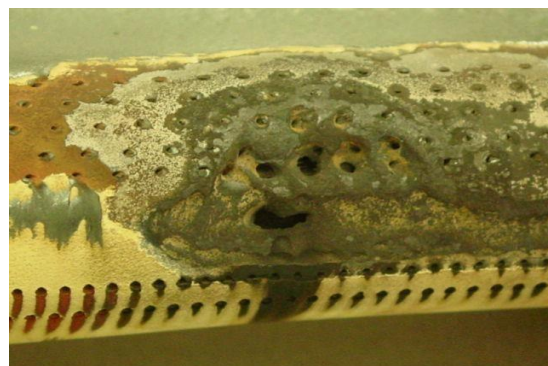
Abrasion to ceramic coated turbine blade.⁶
